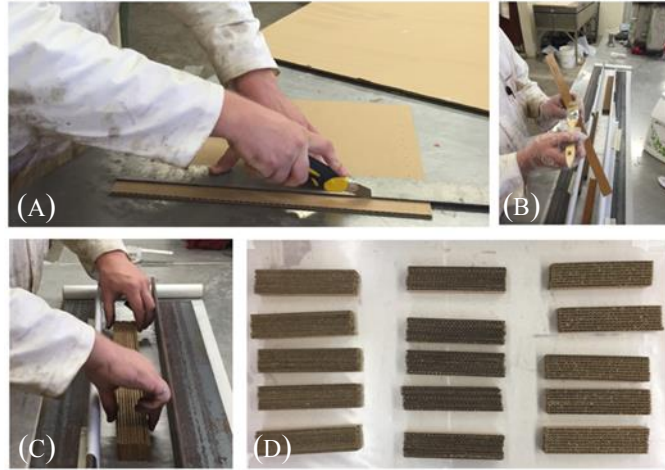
Cardboard Core Fabrication: (a) Cutting; (b) Applying adhesive; (c) Combining into one core; and (d) Completed cores for 150 mm span.
